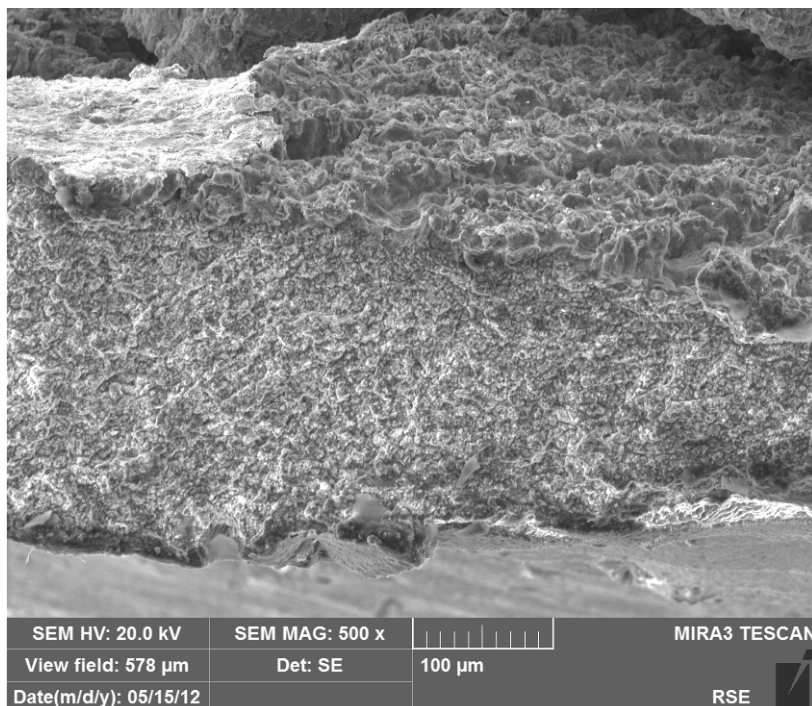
Aspect of bond coat in crack initiation area of fracture surface (R262-6)
